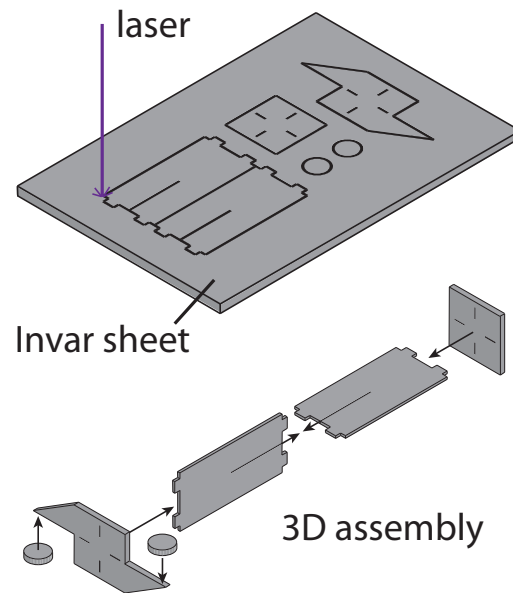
Sensor beam components are machined in 2D with a laser (top) then assembled in three dimensions (bottom). Seams are laser-welded to join the pieces together. Refer to Fig. 5.2 for relevant dimensions of the final assembly.
